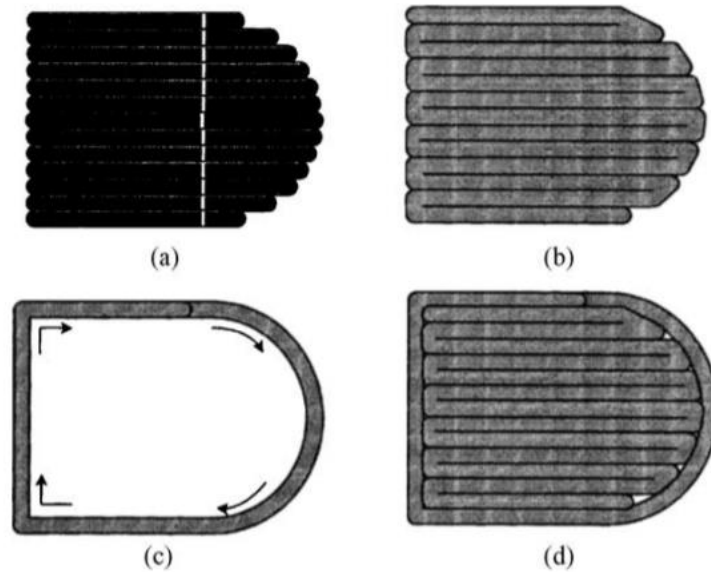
Images the layer: (a) laser filled with raster, (b) welding filled with raster, (c) outline filled with vector, and (d) welding RP (Zhang, Y. et al., 2003)
